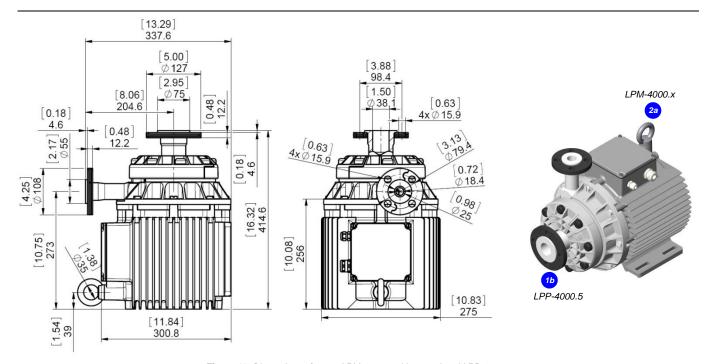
Dimensions of motor LPM-4000.x with pump head LPP-4000.5 (Same basic dimensions as motor LPM-4000.x with pump head LPP-4000.1 and LPP-4000.4)
